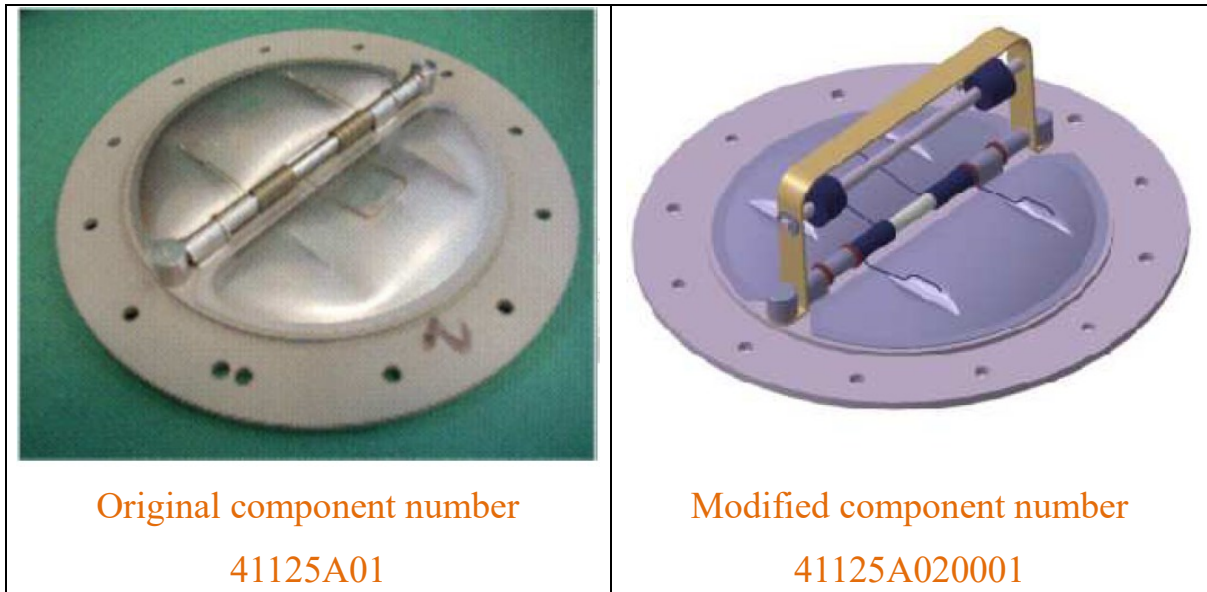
Original Check Valve (Left) and Modified Check Valve (Right)
